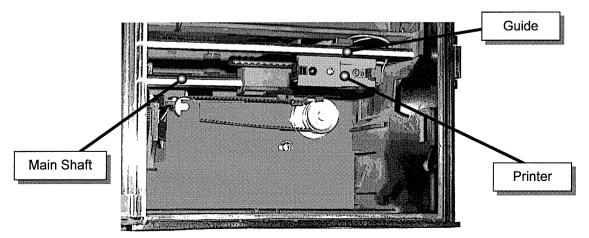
Layout of Guide Shaft, Printer and Main Shaft
